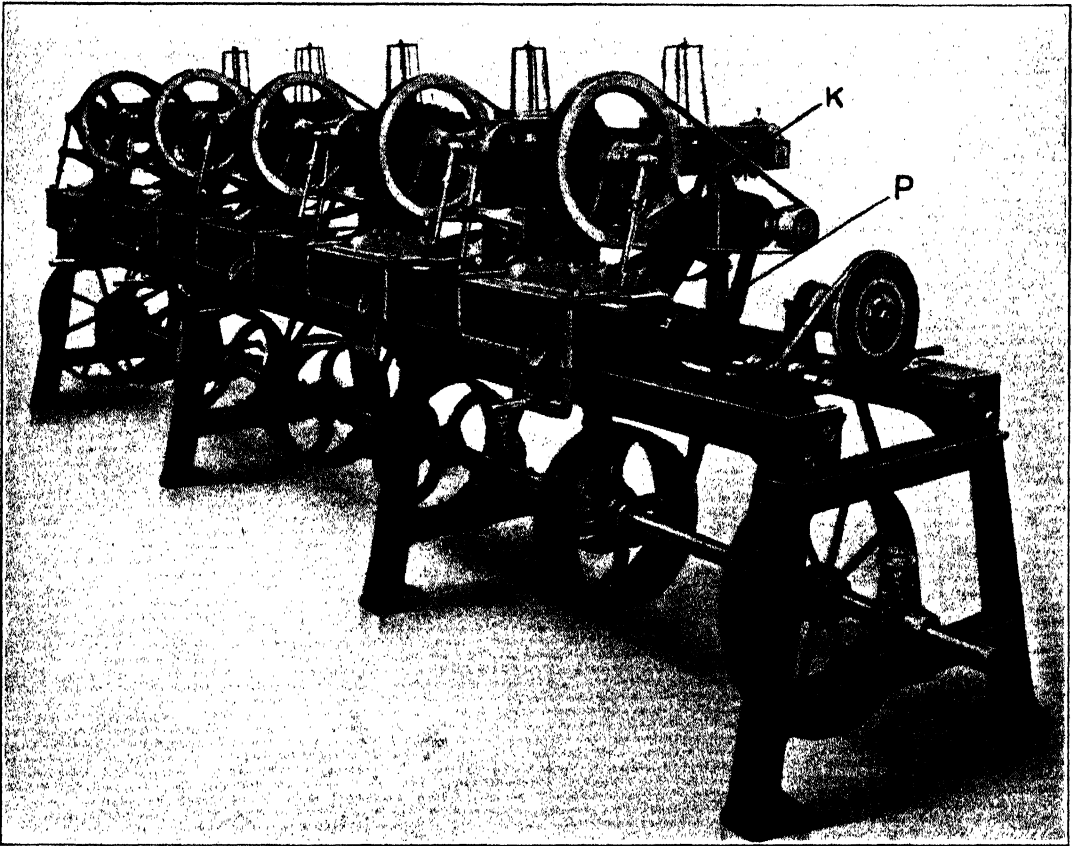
BATTERY OF FIVE PIN-MAKING MACHINES—E. WHITE.
